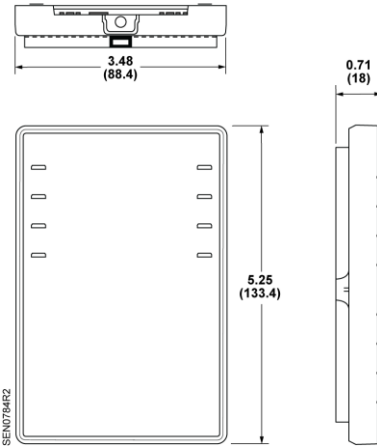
QMX3 Series Room Units Overall Dimensions in Inches (Millimeters).
